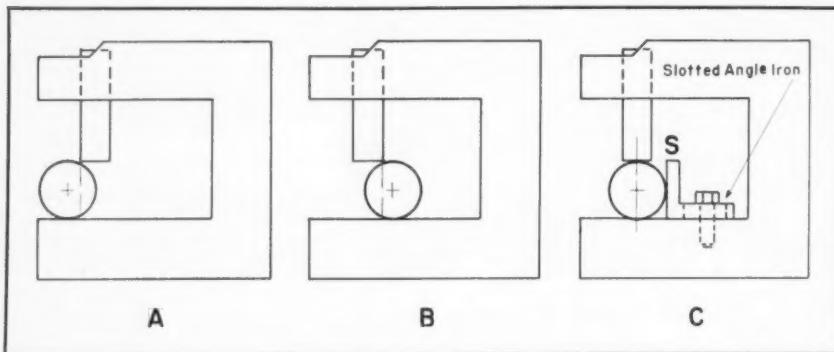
Using the flush pin gage as an example, this sketch illustrates the philosophy of ready workpiece positioning.
